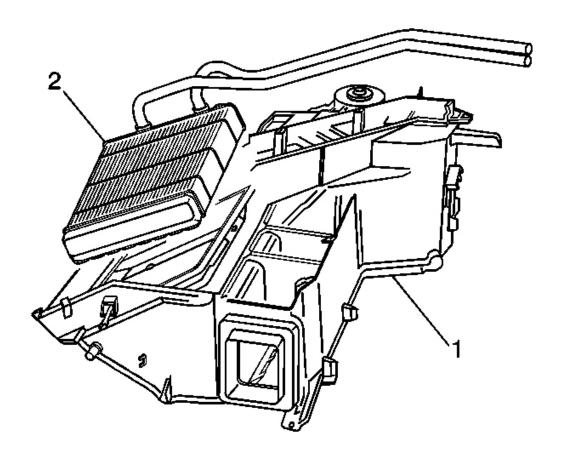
Removing/Installing Heater Core Courtesy of GENERAL MOTORS CORP.
